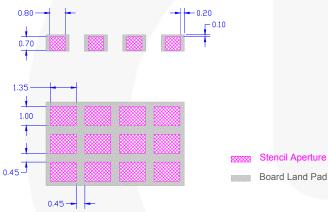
Stencil Aperture Design for Solder Paste Printing on Board for Power88 (in mm)
